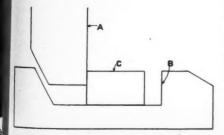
Drawing showing principle upon which riveting mechanism operates.
